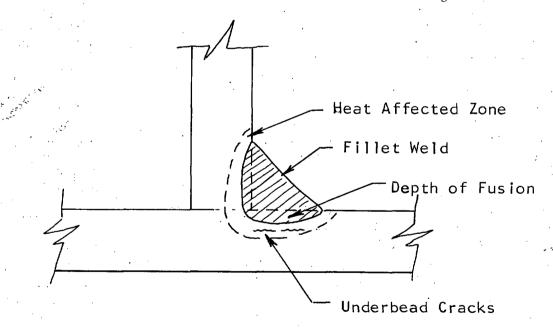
Underbead Cracking in a Fillet Weld
